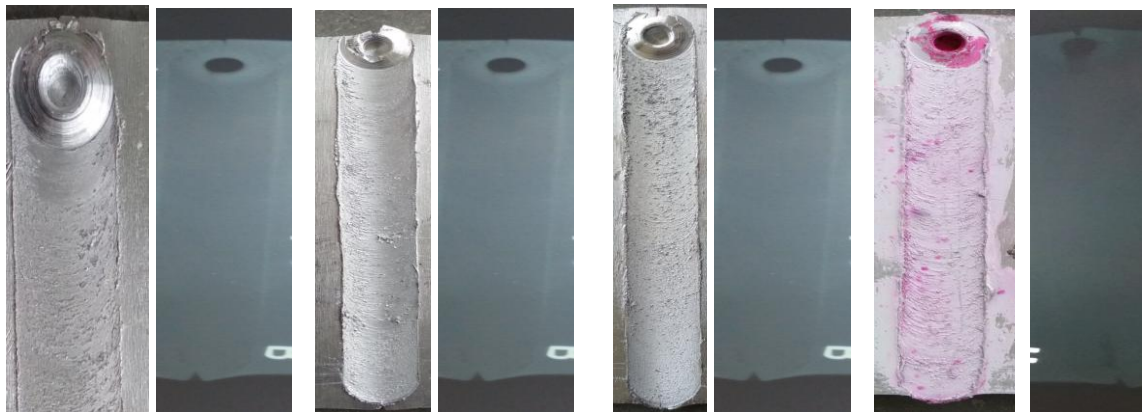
Photographs and Radiographs of welds 1120 rpm and feed rates of 50, mm/min 2^0 tool tilt angle and tool pin profile
